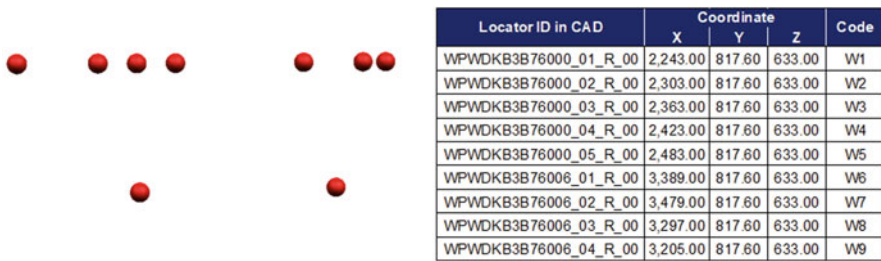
Sample weld table extracted from CAD data
